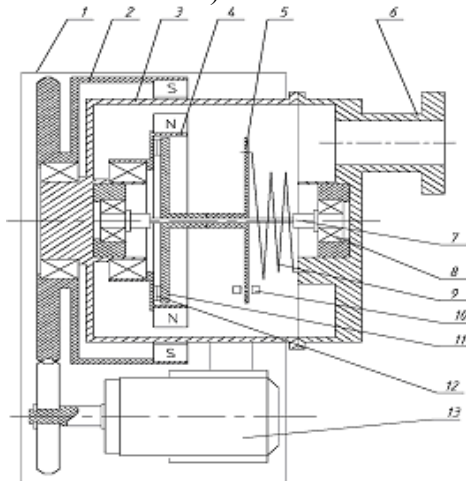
The first scheme of ultra wide range vacuum sensor [7] is based on Si-Si friction pair: 1 is a screen, 2 is a rotating magnet drive, 3 is a case, 4 is a rotor, 5 is a measuring rotor, 6 is a vacuum flange, 7 is a shaft, 8 is a supporting ball bearing, 9 is a torsion for measuring torque, 10 is an optron sensor, 11 is the first rubbing ring, 12 is the second rubbing ring, 13 is a driving motor.
